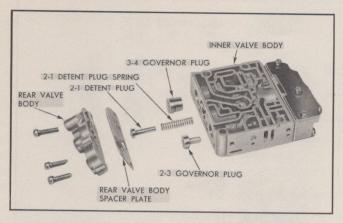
Governor Plugs, 1-2 Detent Plug and Spring
